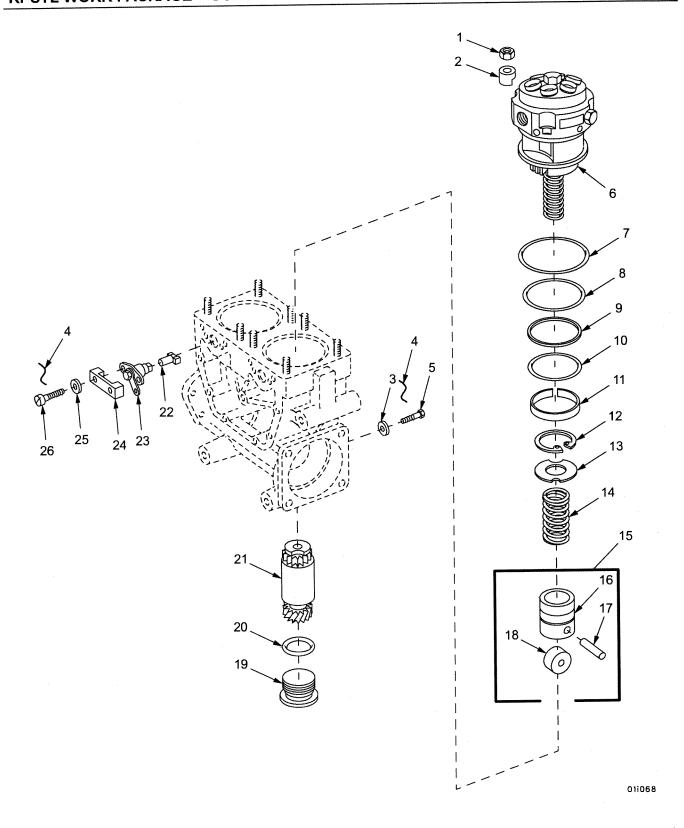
Head Assembly, Tappet Assembly, Gear Shaft Assembly, Control Unit Assembly and Associated Parts.
